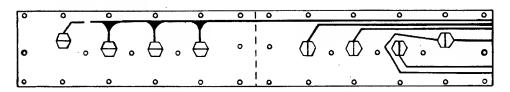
Full-Size Partial Drawing of the Flex-Circuit Layout Showing the Trace which Must be Cut if the Auto Reset Option is Desired.
